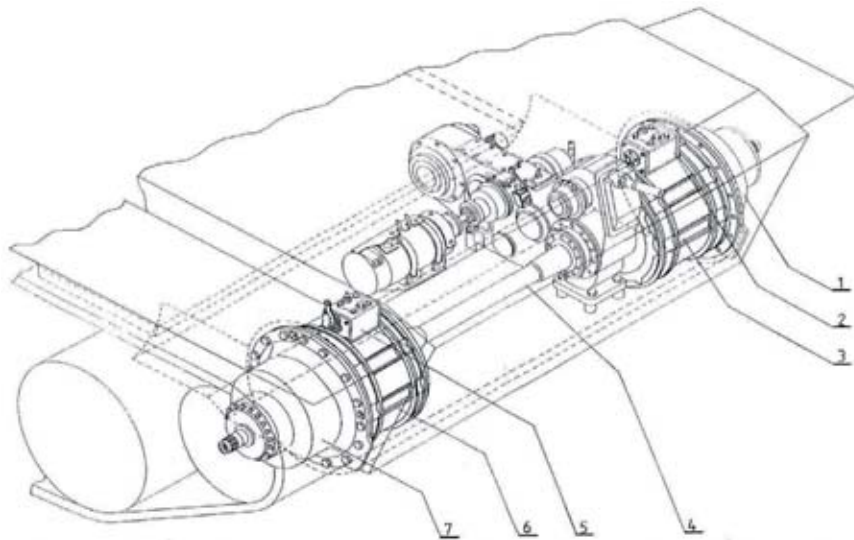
The schema of the driving system and the distribution and fastening of gear-boxes of the basic tank in the driving section: 1, 7 - side-drives; 2, 5 - distributive mechanisms; 3, 6 - geared boxes; 4 - the geared shaft
